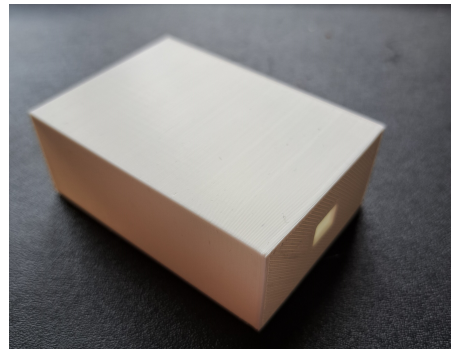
Printed version of encasing design 2 of IR tracking device
